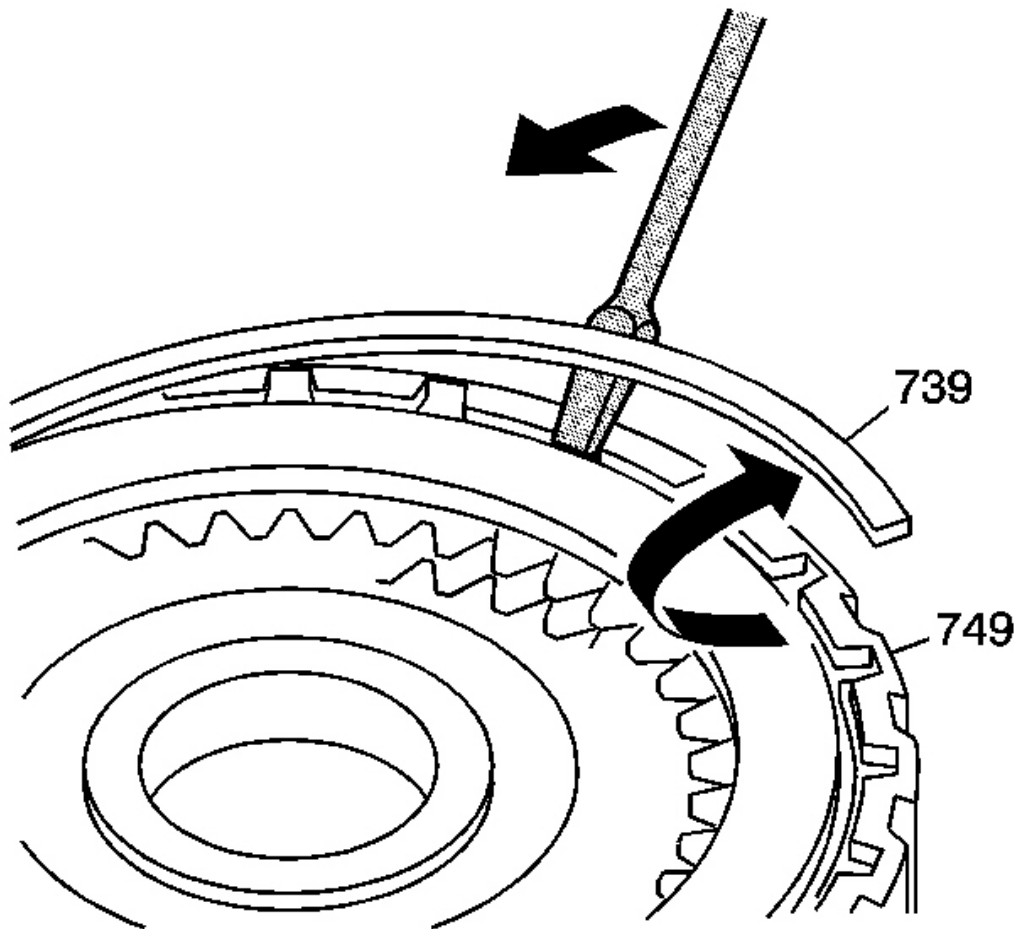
Removing The 2nd Clutch Backing Plate Retaining Ring Using J 28585
